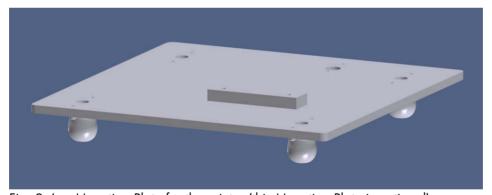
e Mounting Plate for the printer (this Mounting Plate is optional)
